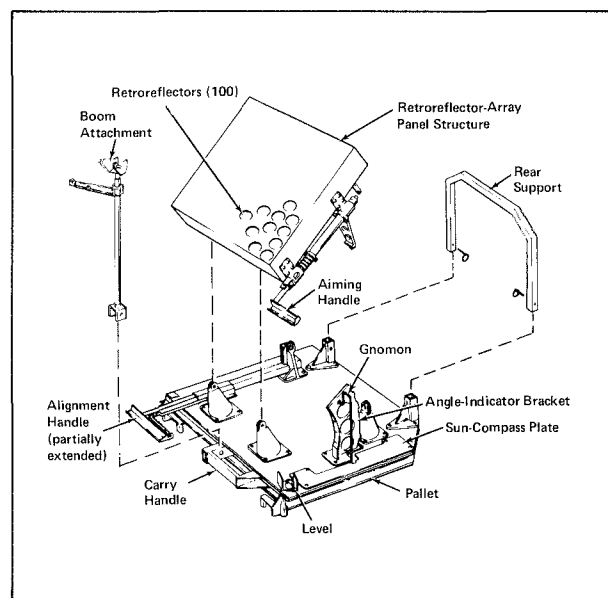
Mechanical Assembly (Apollo 11 LRRR)
